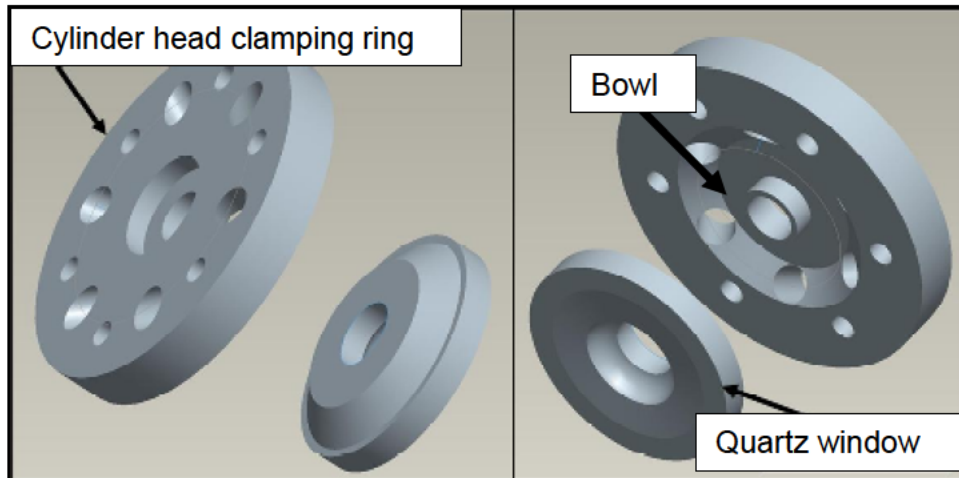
Two views of the CAD design in PRO/e for the clamping ring and the quartz bowl to replace the stock cylinder head for the OS 46 FX engine.
